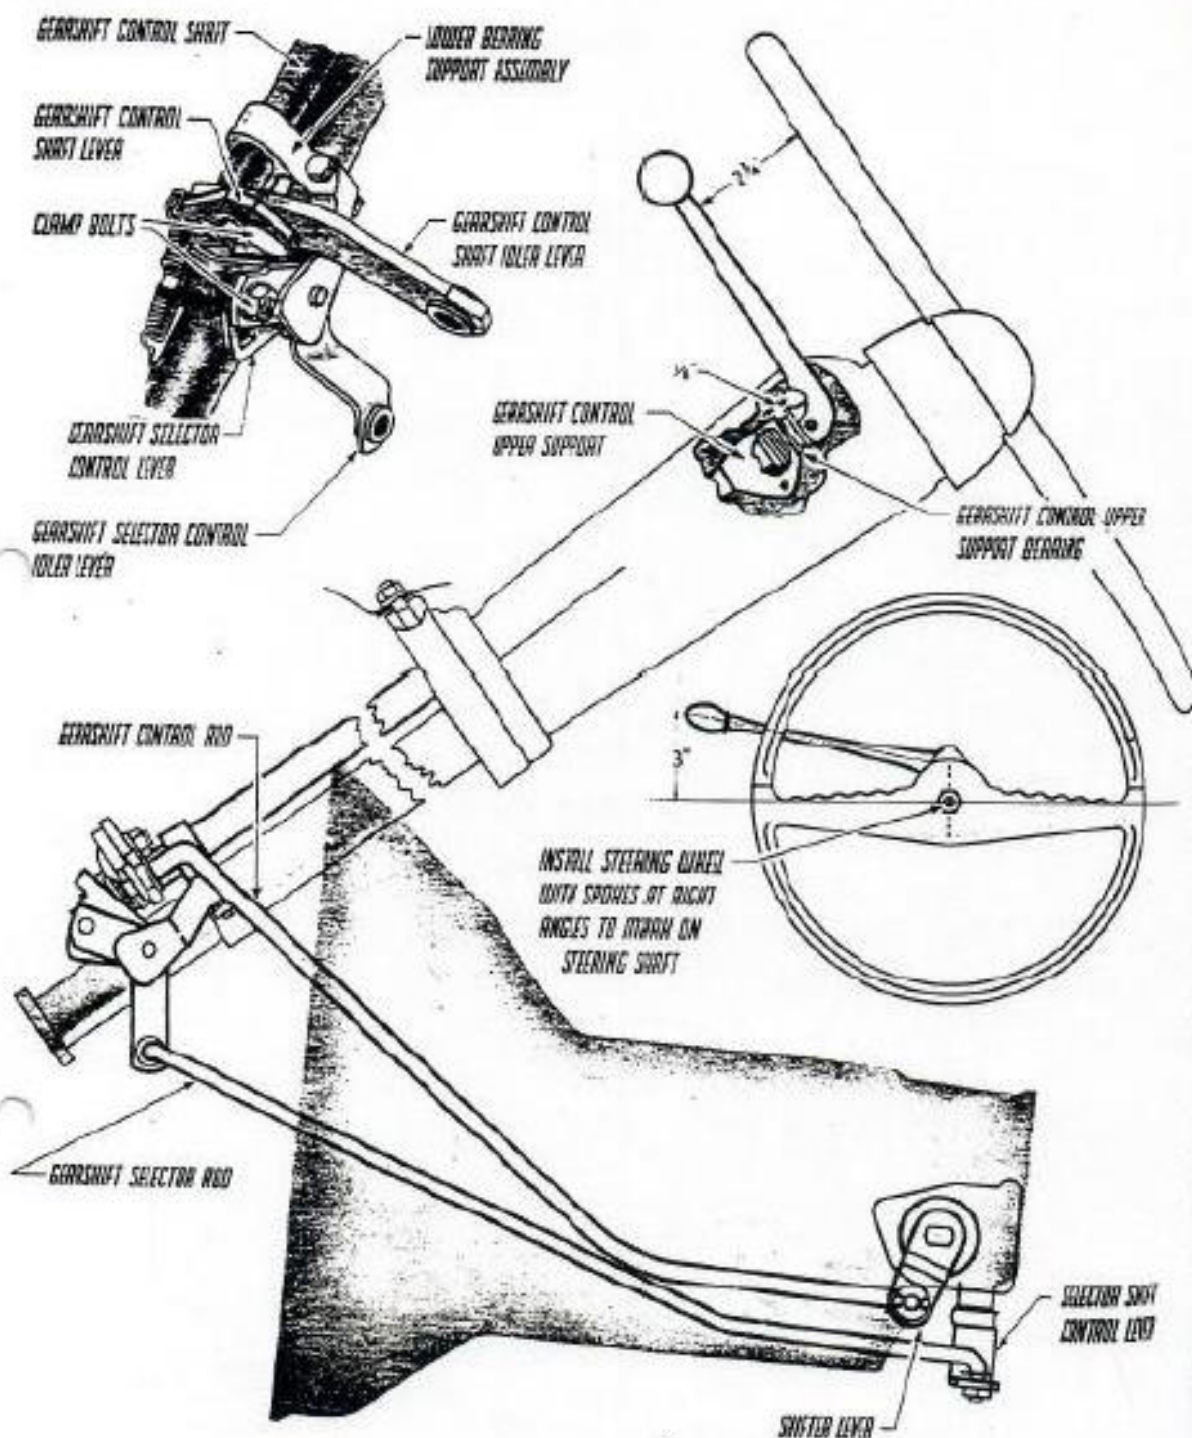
Gearshift Linkage and Gear Lever Adjustment
